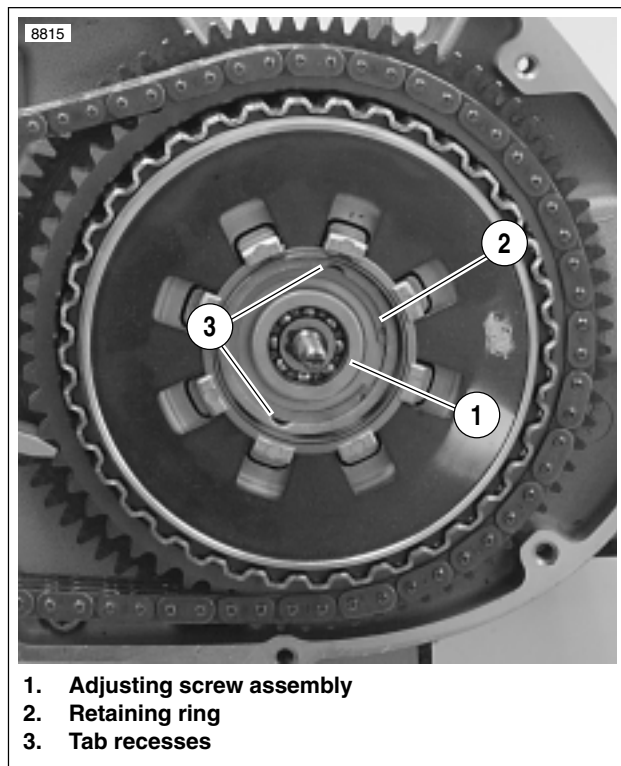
Clutch Adjusting Screw Assembly and Retaining Ring
